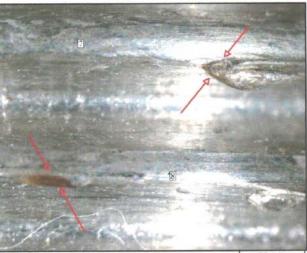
Higher magnification of damage to threads 10-12 showing material movement and thread shearing.
